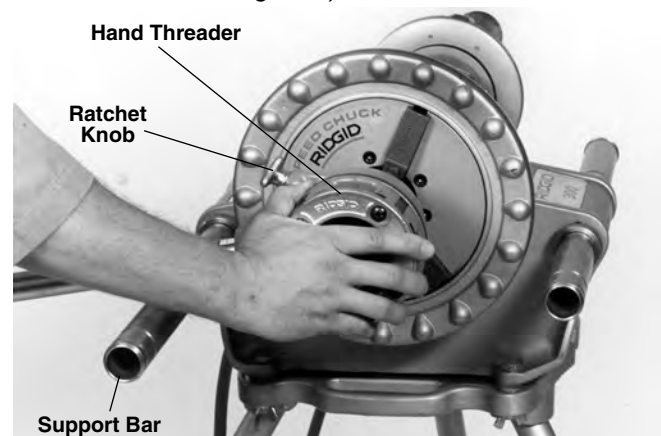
Pushing Hand Threader onto Pipe to Engage Dies
